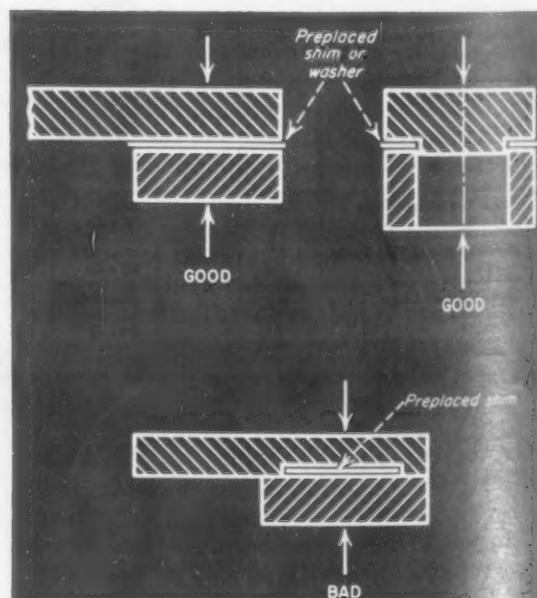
Where shims or thin flat filler sections are to be preplaced, joints should be designed to permit parts to close up the clearance by applying pressure.
